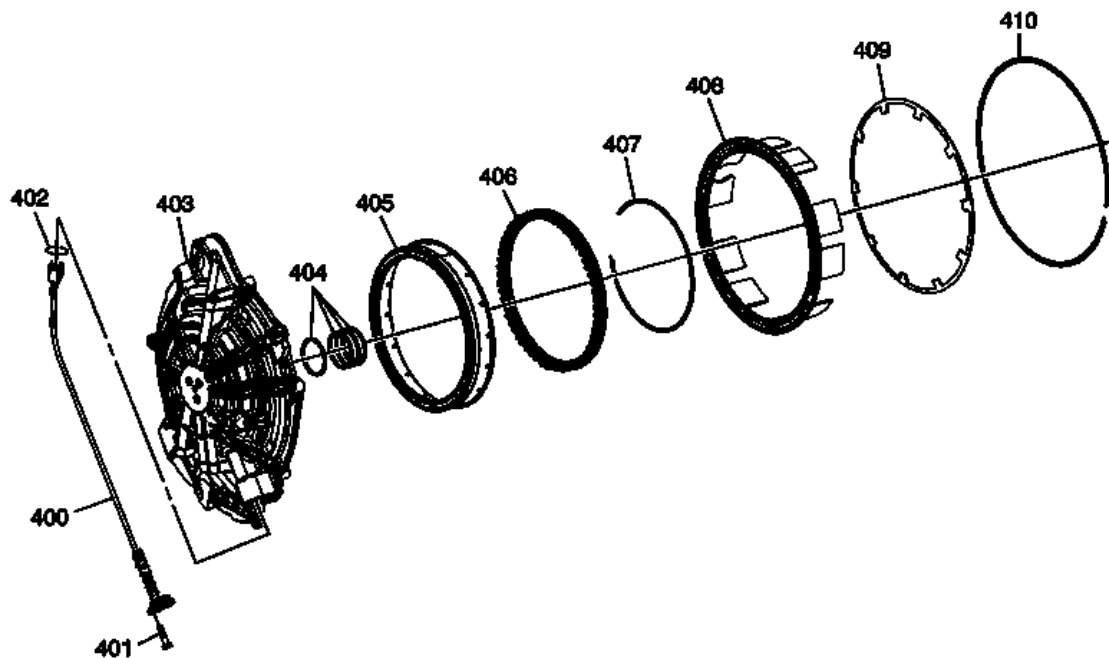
A/T Case Cover, 2-6 & Low Reverse Pistons & Retainer Rings
